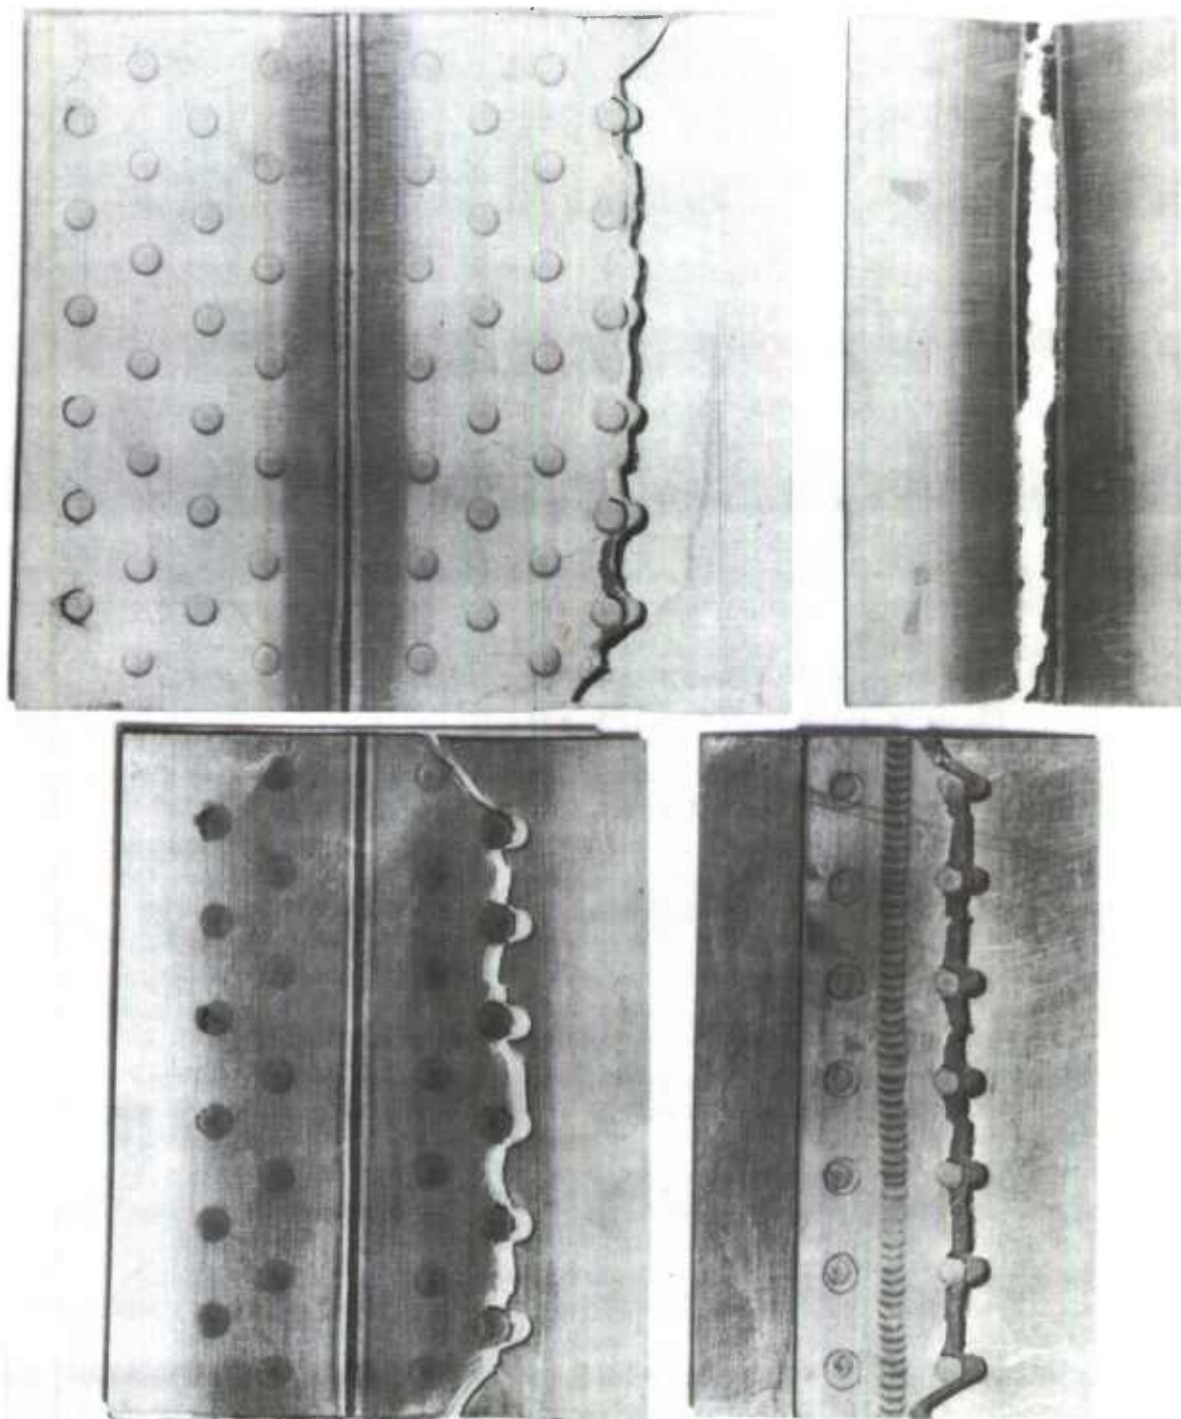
Fractured Fatigue Specimens - Ti-5Al-2.5Sn Alloy (78° F)
